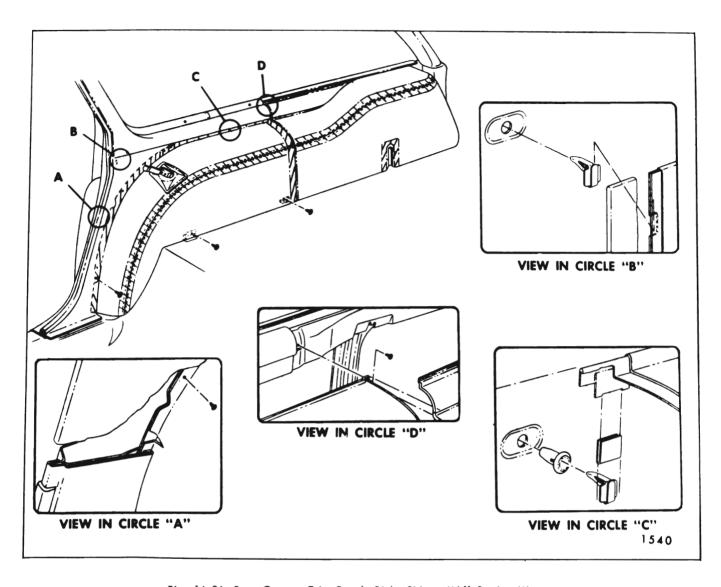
Rear Quarter Trim Panel, Right Side - "A" Station Wagons
